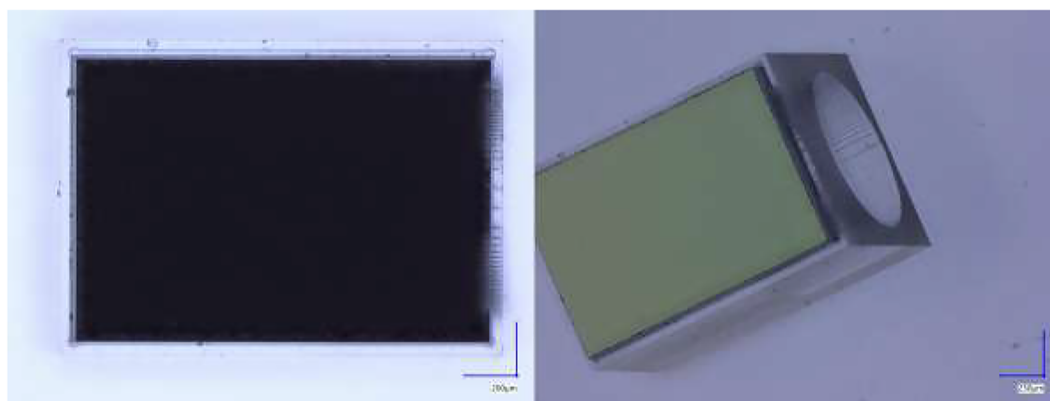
Photographs of a silicon chip placed in the rectangular cutout of a first generation fabricated glass chip; top view (left), isometric view (right). The cutout is designed for easy alignment of the channel-hole-channel of the sample delivery system. The cylindrical cutout visible in the isometric view of the glass chip will be used for microtubing which connects the fluidic network of the EPRoC device to the outside world.
